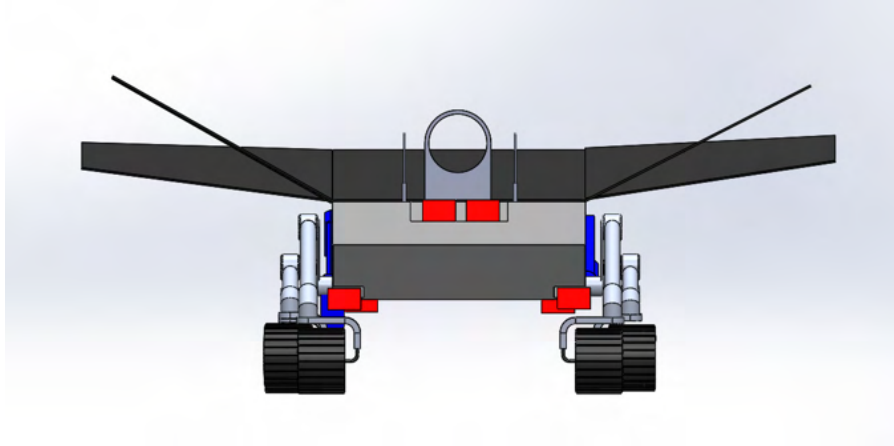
CAD model of Poli'ahu rover in front view during solar panel unfurling.
